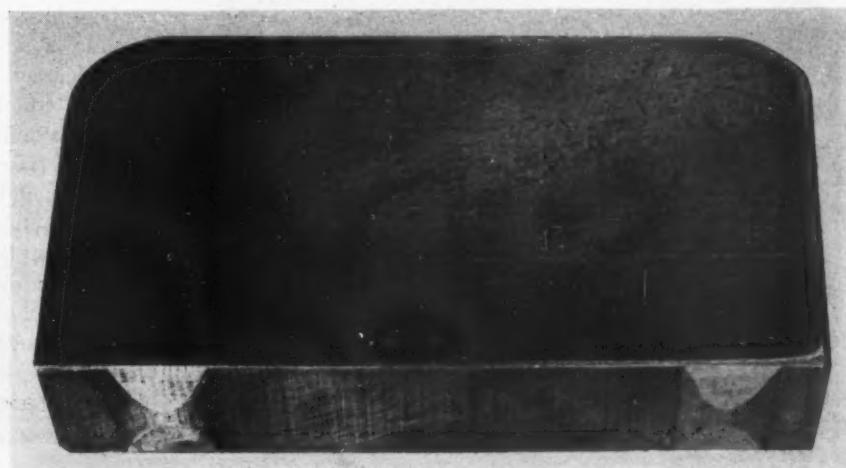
Right—Projections on base block A are made by form milling in two directions
